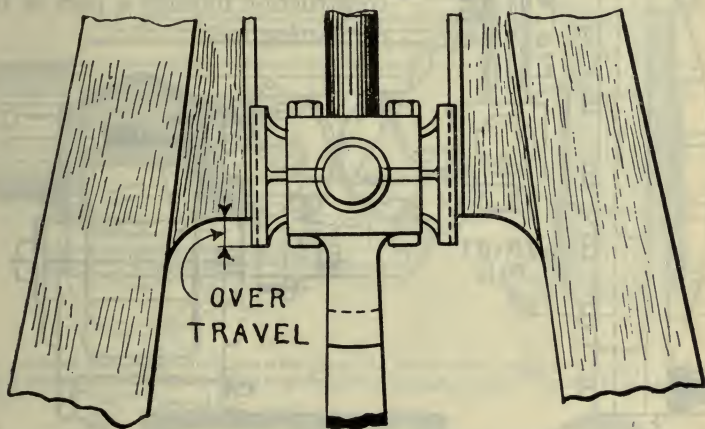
Detail of marine crosshead and guides illustrating overtravel. The gibs may project considerably beyond the end of the guide at the stroke ends, because the thrust on the guide diminishes to zero at the dead centers. The gibs should overtravel because a full length guide is unnecessary, and the parts are usually made more accessible by the shortened guides.
